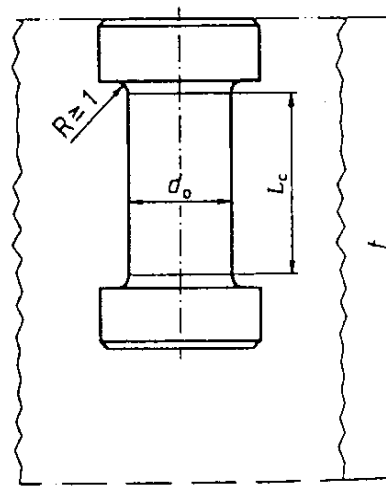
Type and preparation of test pieces without extension pieces, where $100 \text{ mm} < t \leq 250 \text{ mm}$
